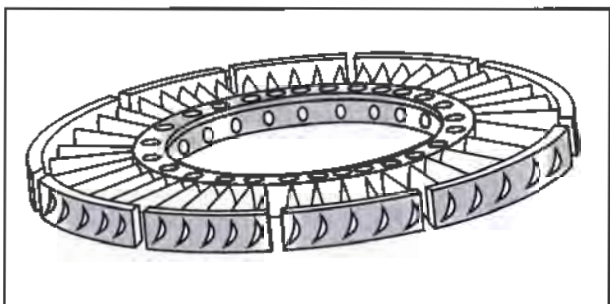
When vanes are riveted or welded into segmented shrouds, the gaps between shroud segments permit thermal expansion.
